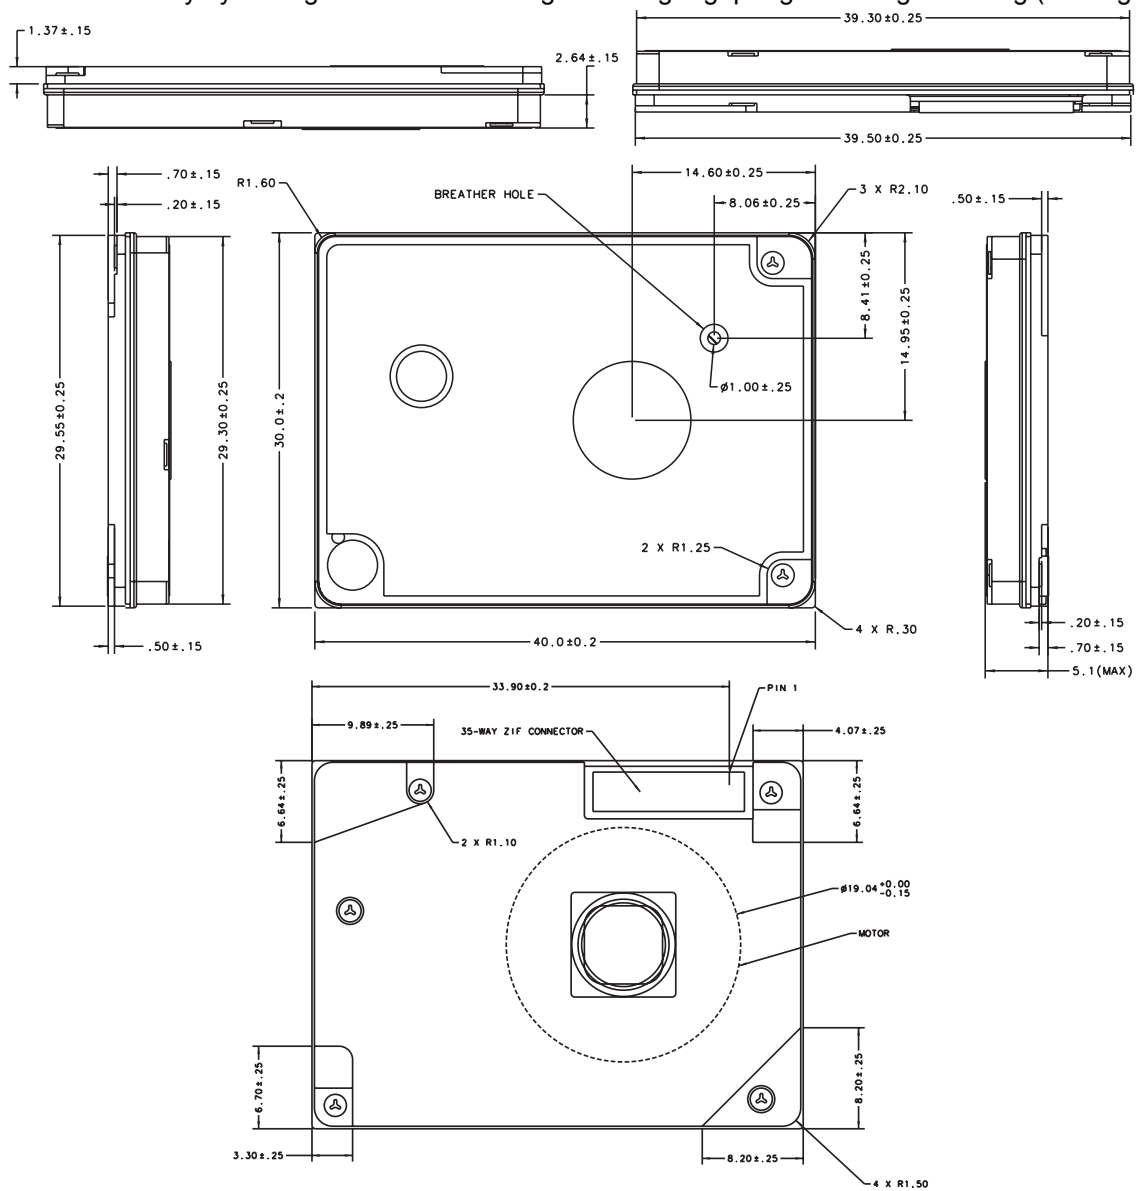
ST1.3 Series mechanical dimensions—top, bottom, side and end view
